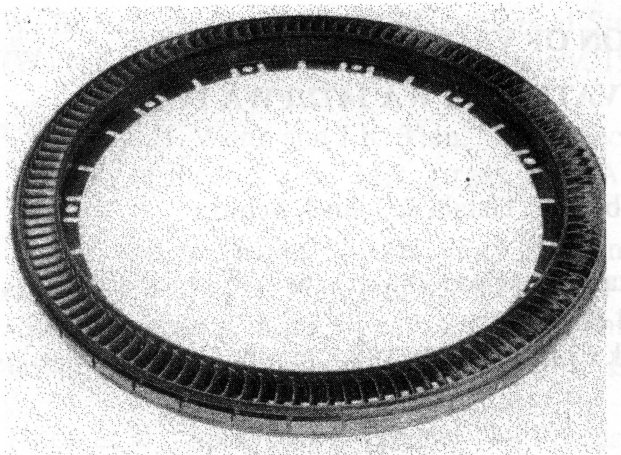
Typical Cast Inconel 718 Integral Compressor Stator Ring Assembly.
